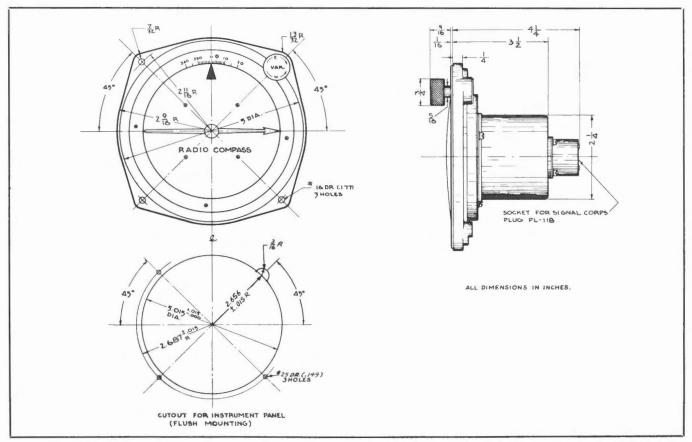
Indicator I-82-A — Outline Drawing RESTRICTED
